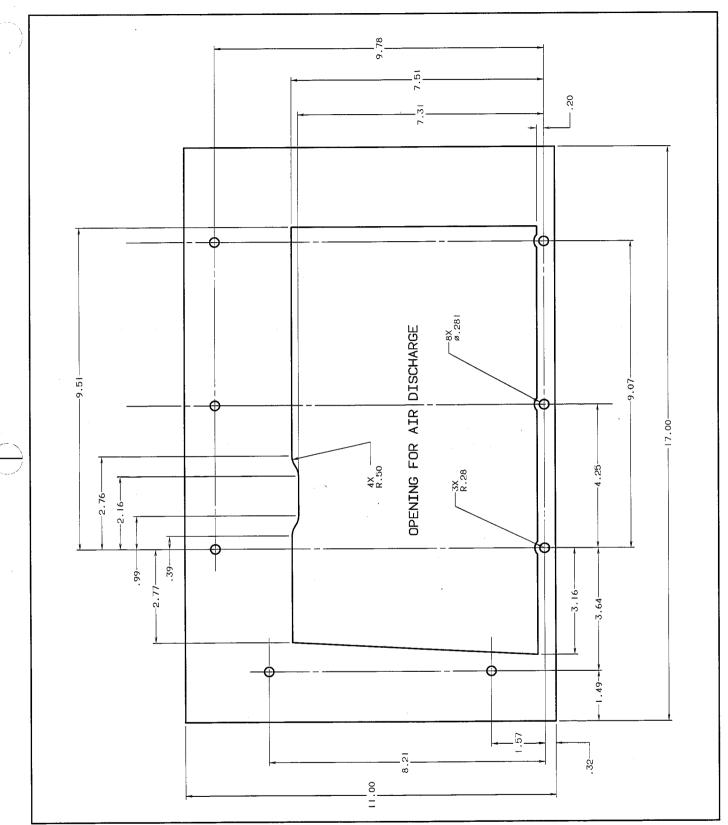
EXHAUST AIR OUTLINE DRAWING
